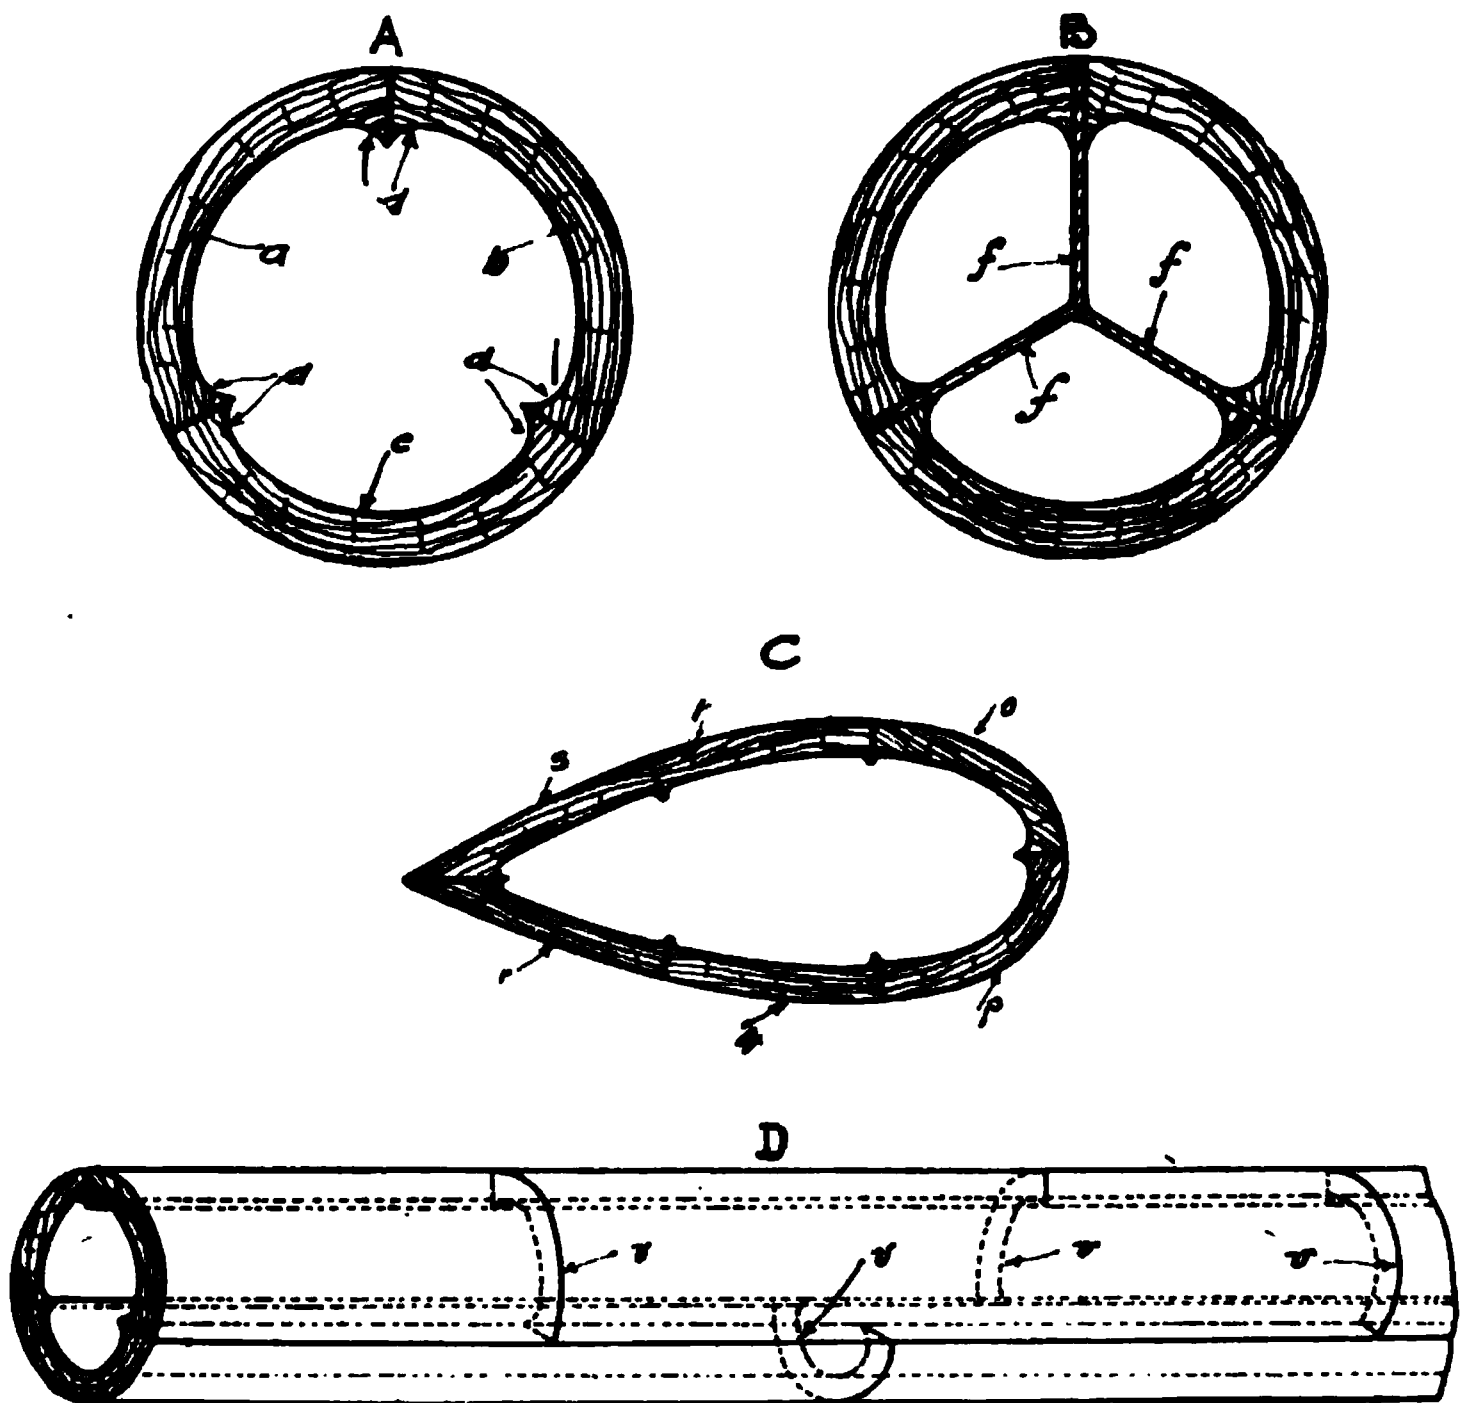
THE RYAN STRUT CONSTRUCTION.
